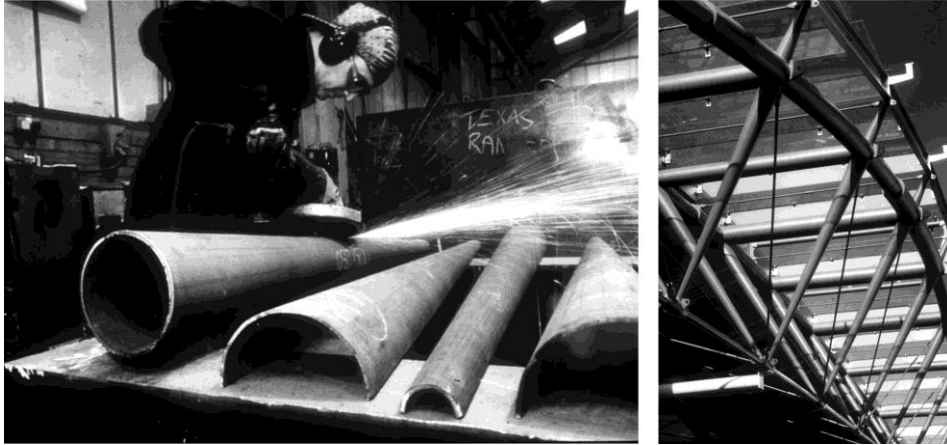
16. Steel half cones constituting the tapered members with welding
